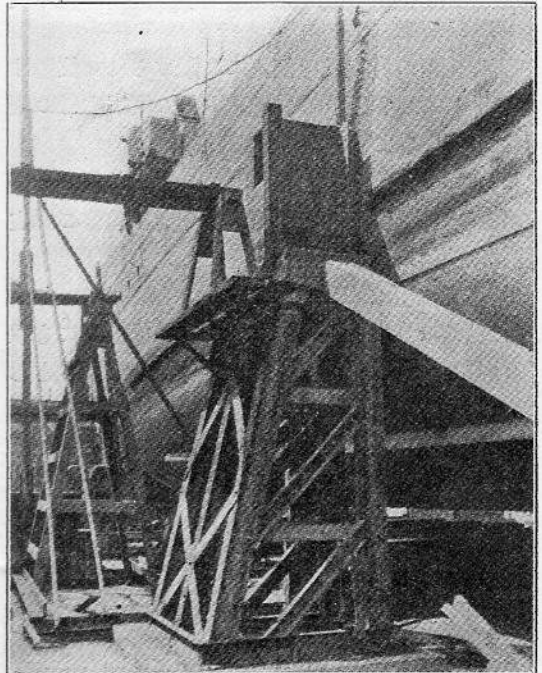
Hogging Test. Details of Support, Port Side, Frames 77-78, showing Tower, Transverse Girder, Doublers on Inside Shellstrakes in Way of Supporting Bulkhead Bounding Bars. (Photograph made after Failure.)
